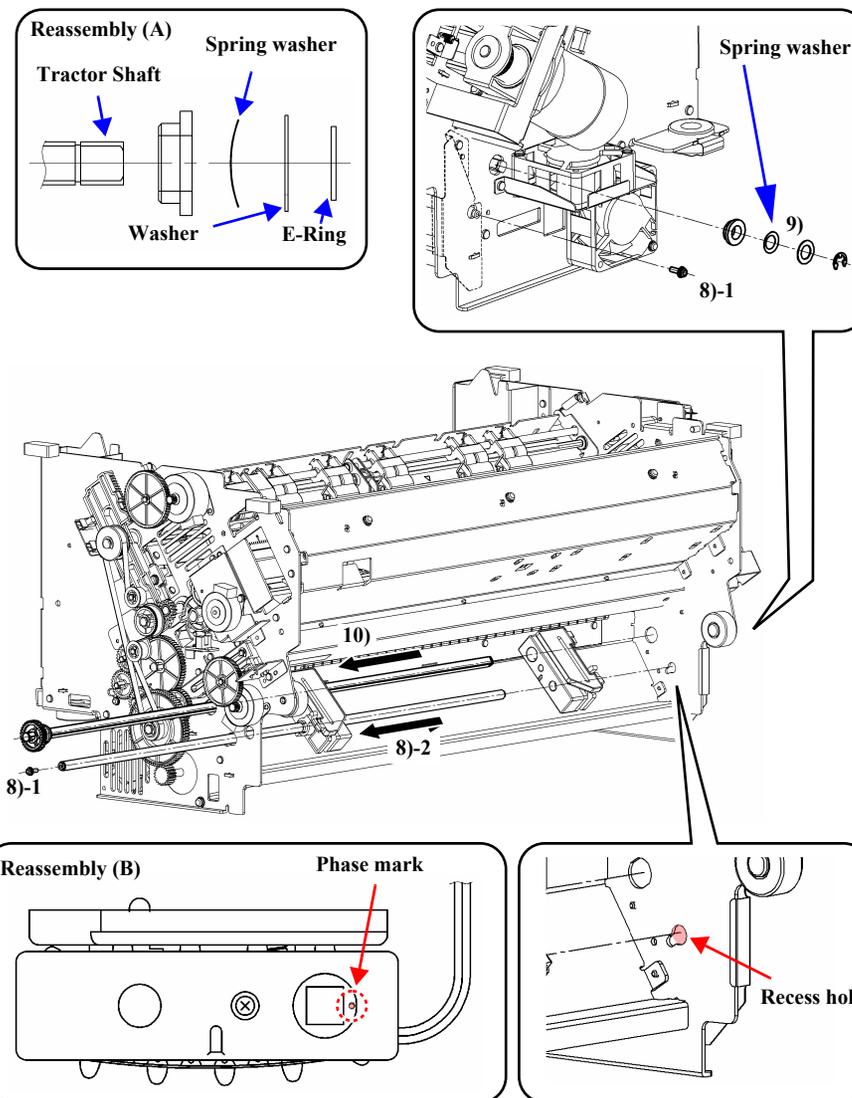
TRACTOR FL UNIT/TRACTOR FR UNIT Removal (2)
